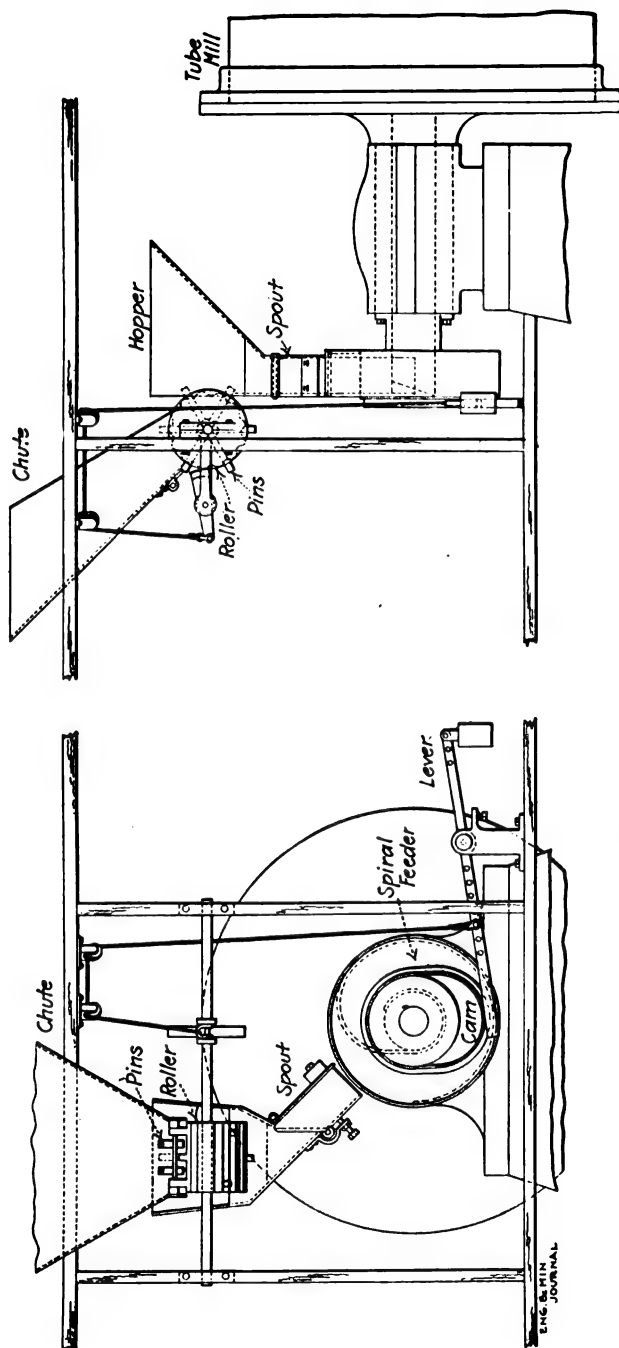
PEBBLE-FEEDING DEVICE FOR TUBE MILLS.
